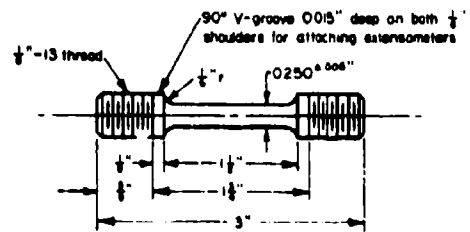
ROUND CREEP - AND STRESS- RUPTURE SPECIMEN
